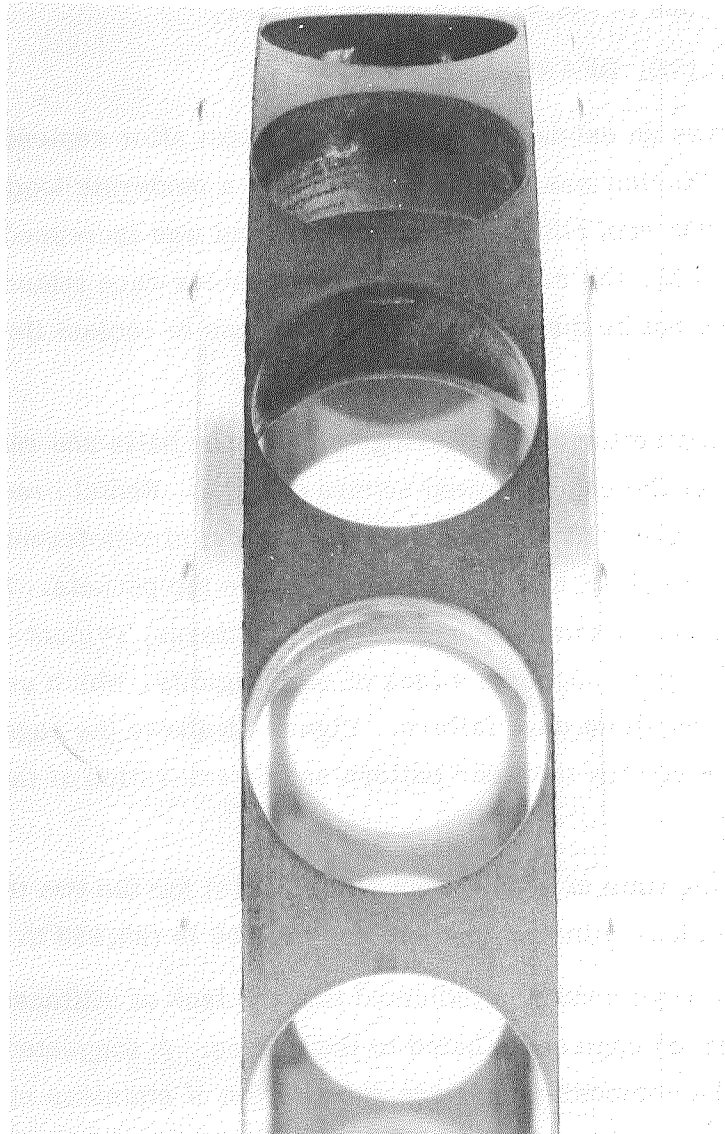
Bearing Cage S/N 248 Showing Wear Scar Depth to the Rivet
